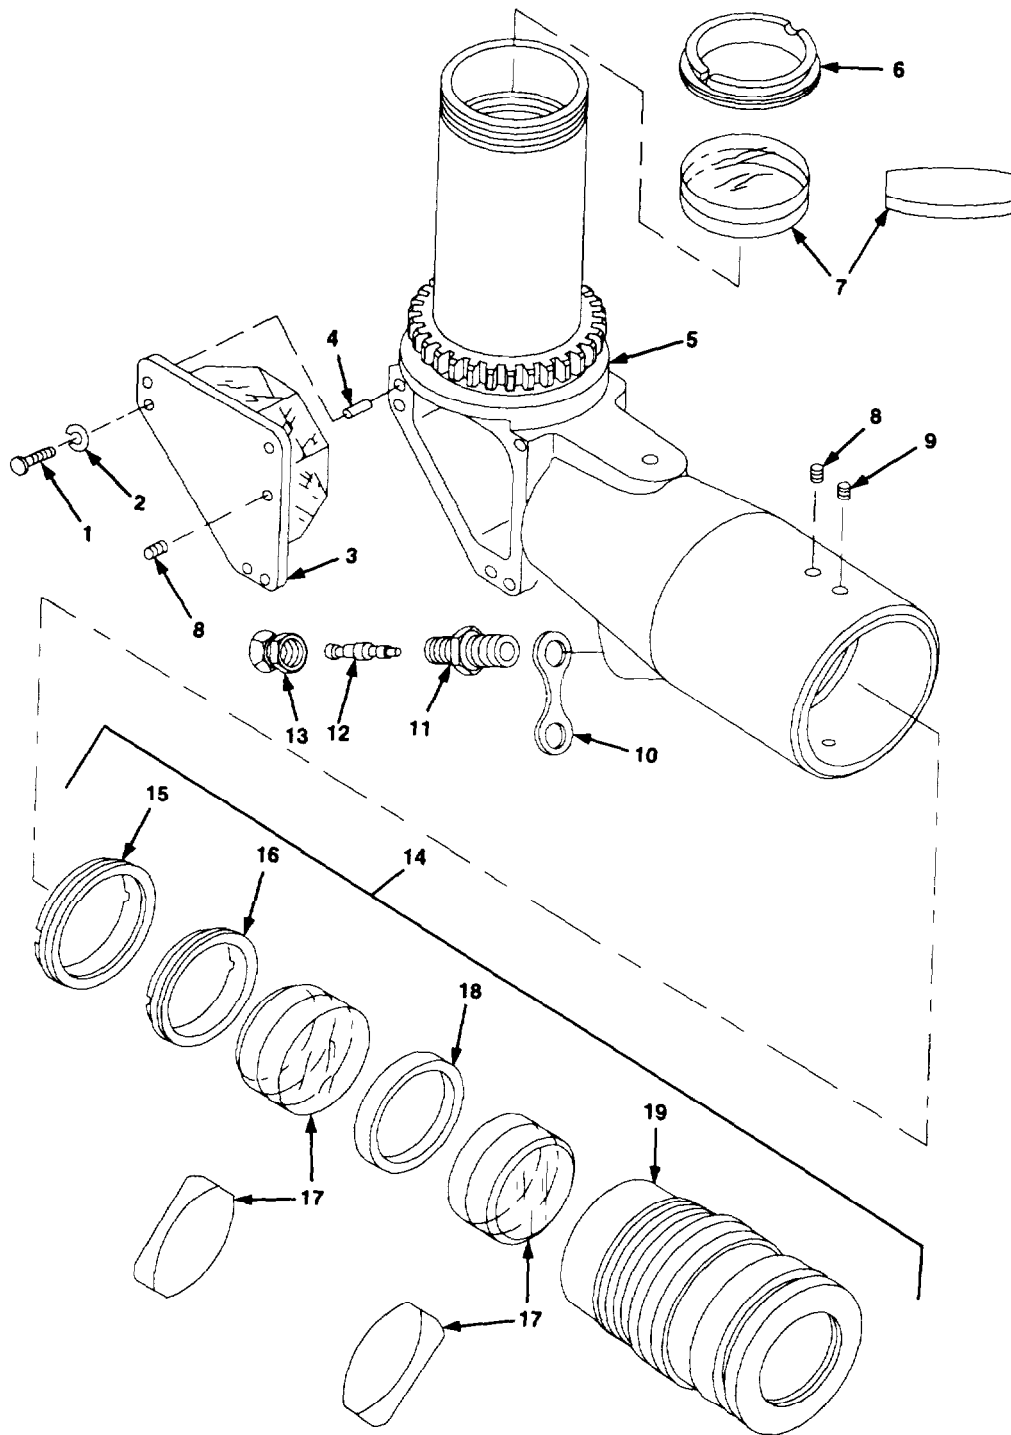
Elbow Assembly 7660410 and Cell Assembly 7660469
